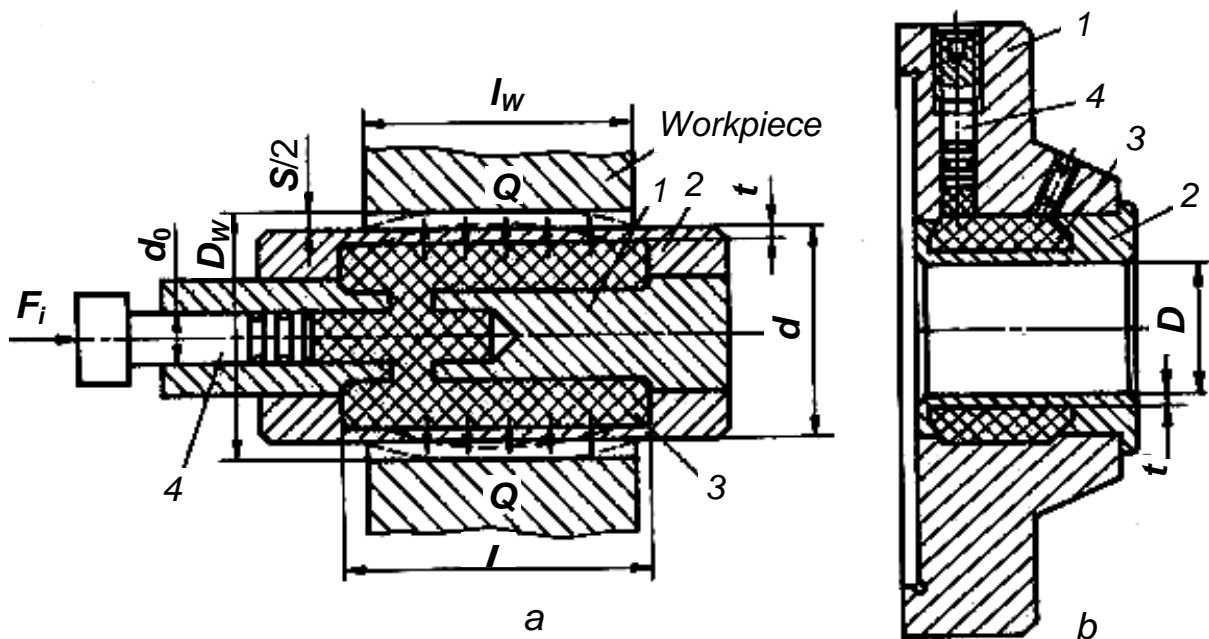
Power mechanisms with hydroplast: *a* – loading diagram for mounting on workpiece hole; *b* – chuck for mounting on external surface of workpiece
